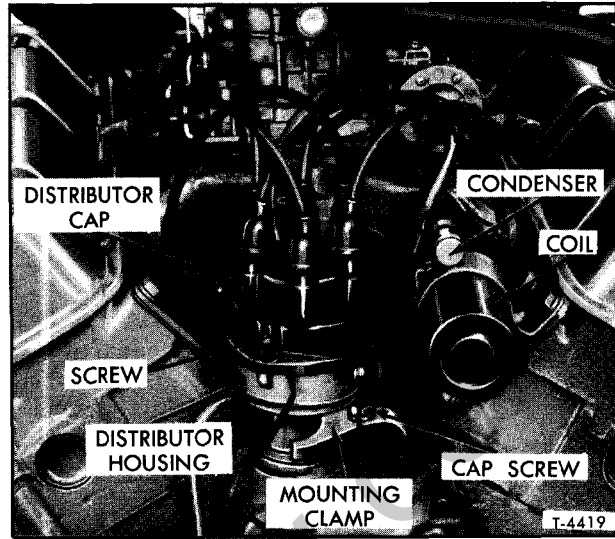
Distributor and Ignition Coil Installed (V6 Engine) (Typical)
